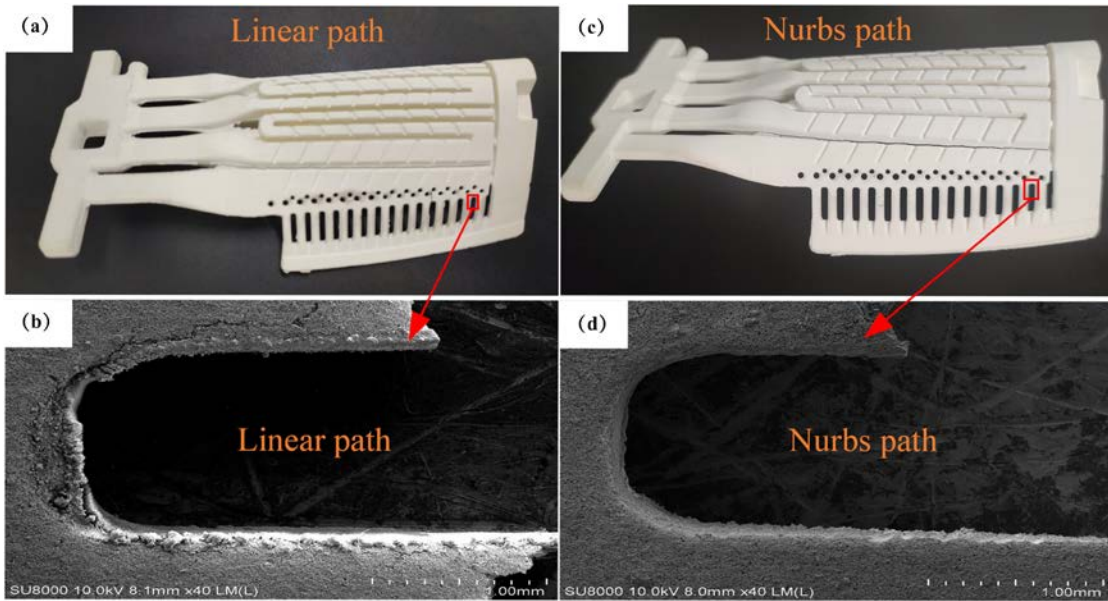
Effects of different tool paths on surface quality ¹². (a) Linear tool path; (b) Surface quality of part machined by linear tool path; (c) NURBS tool path after corner smoothing; (d) Surface quality of part machined by smoothed NURBS tool path.
